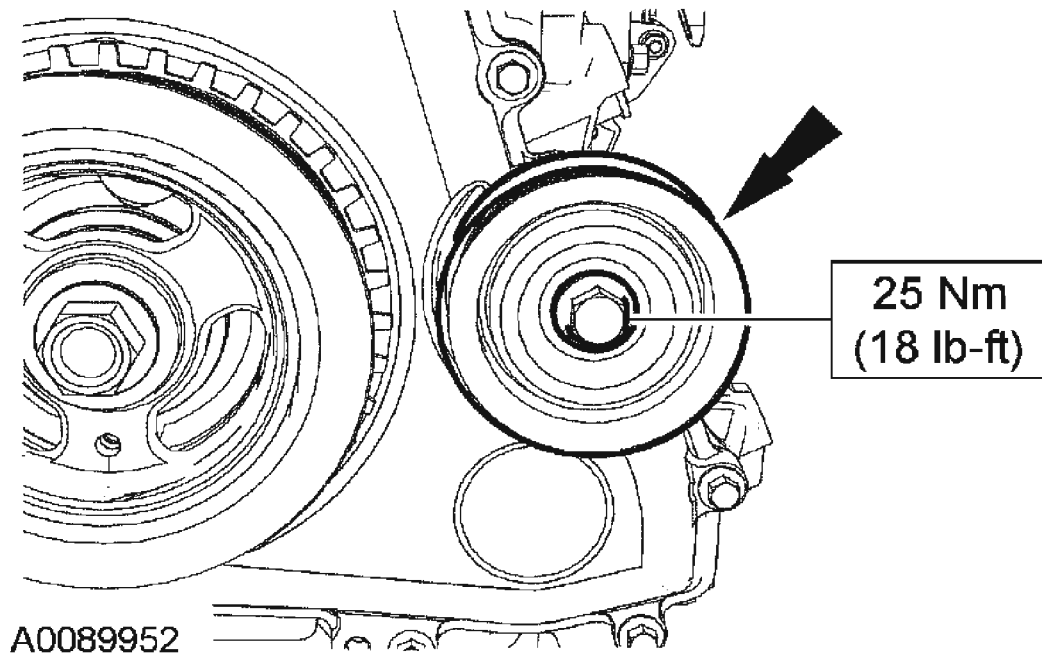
Installing Accessory Drive Belt Idler Pulley And Bolt
